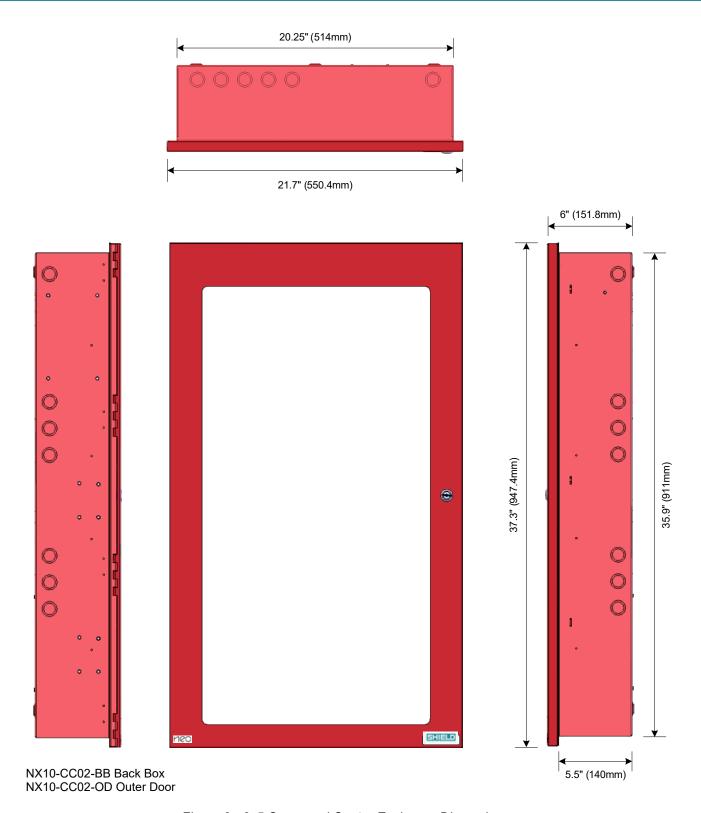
3x5 Command Centre Enclosure Dimensions
